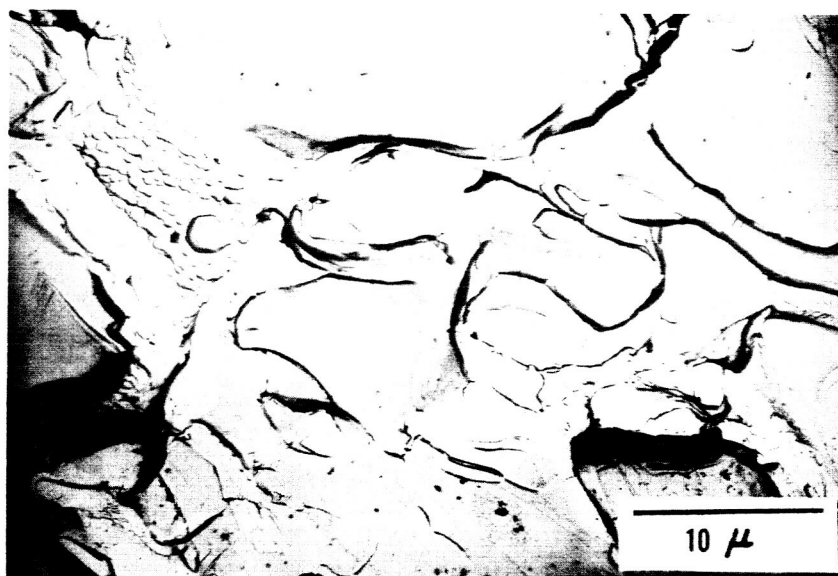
TYPICAL PARTICLE FRACTURES NEAR FRACTURE SURFACE OF 356-T6
